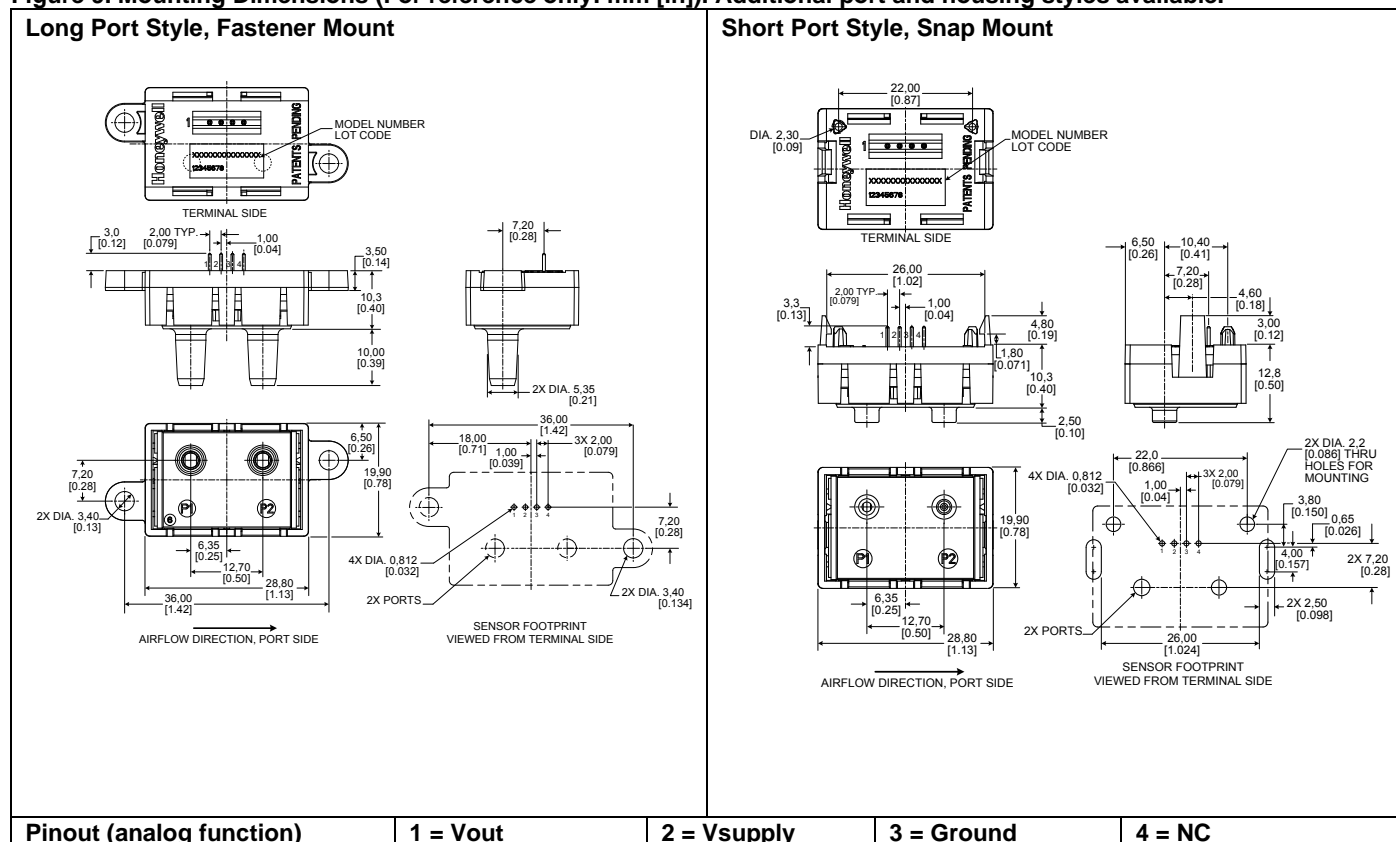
Mounting Dimensions (For reference only: mm [in]). Additional port and housing styles available.
